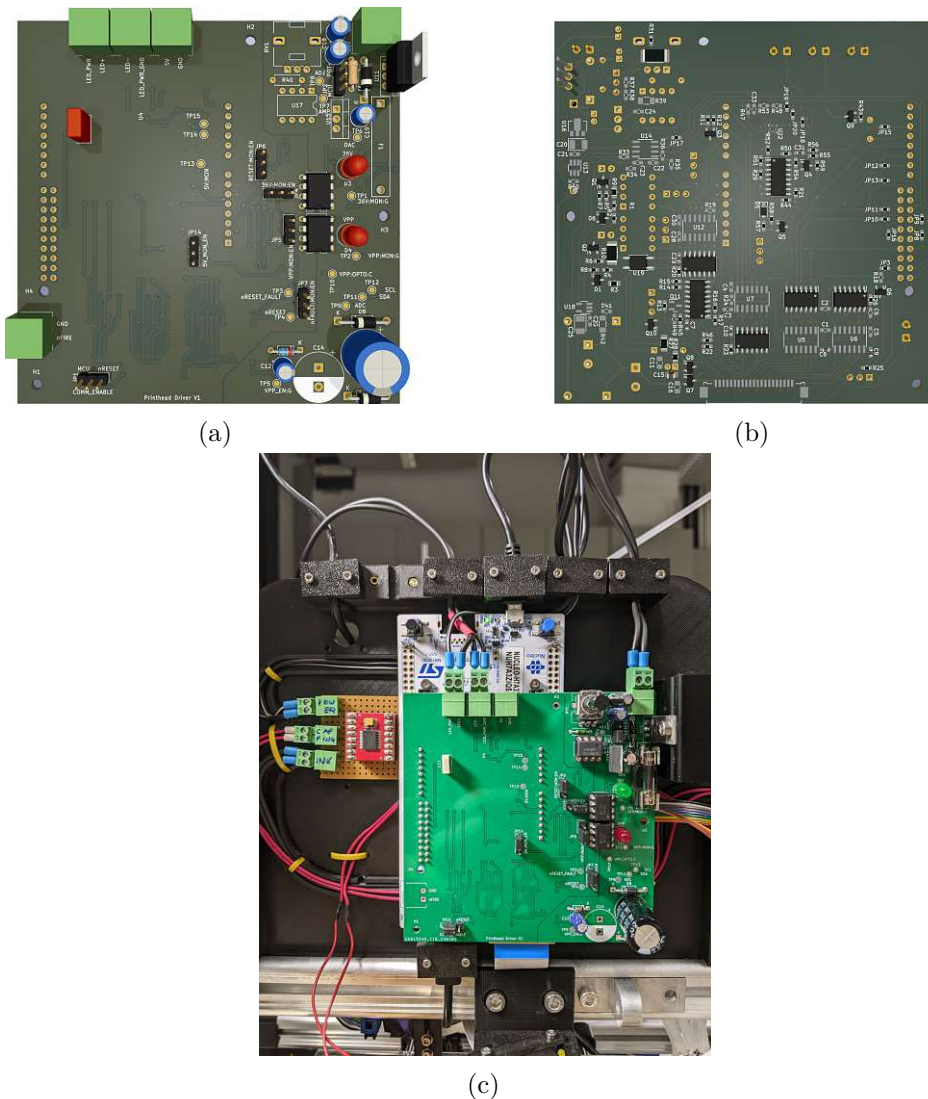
Xaar 128 driver shield renderings. Front side (a), back side (b) and the completed printhead drive electronics assembly including the NUCLEO development board (c).
